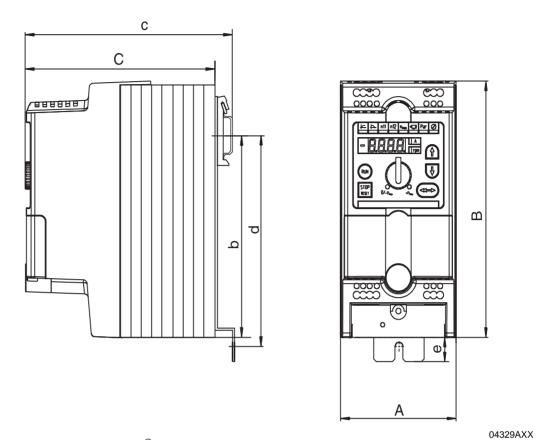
MOVITRAC[®] 07 dimensions for DIN rail mounting (optional accessory)
